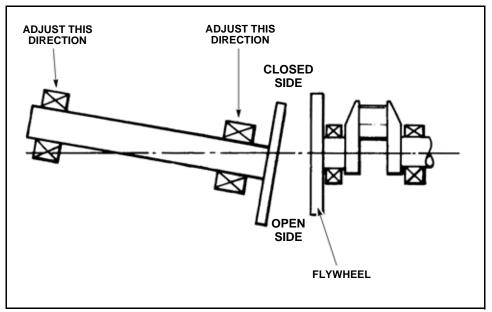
Make Adjustment to Close the Open Side of the Coupling
